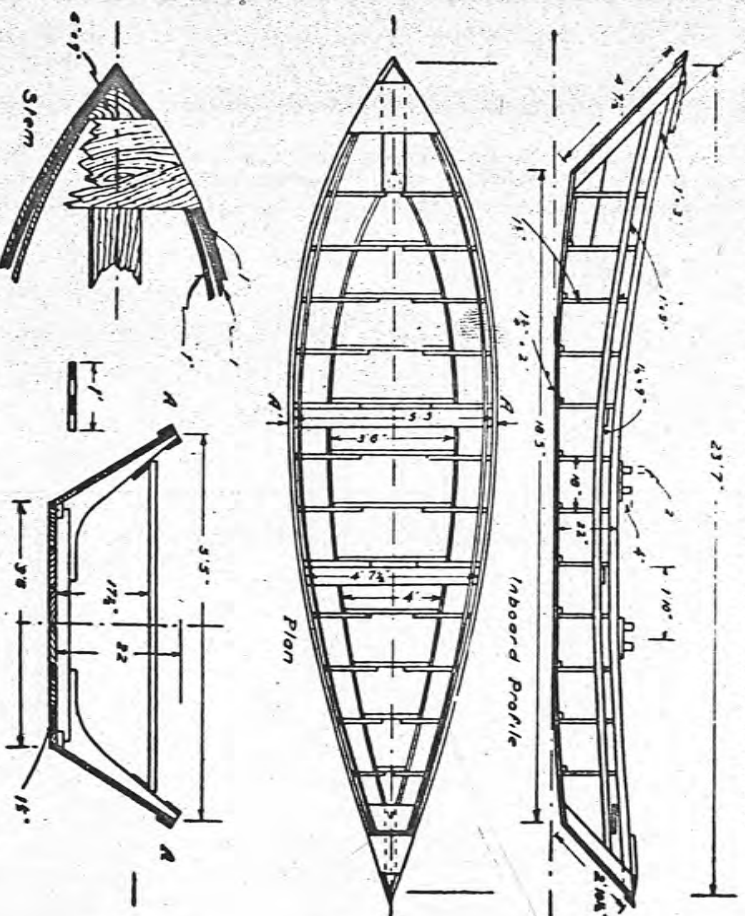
Drive boat—St. Maurice River Boom and Driving Company, Ltd.
